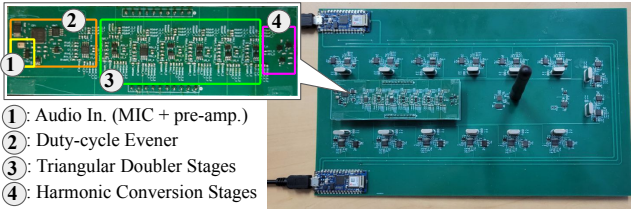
PCB prototype of AcouBLE's clock seeder.
